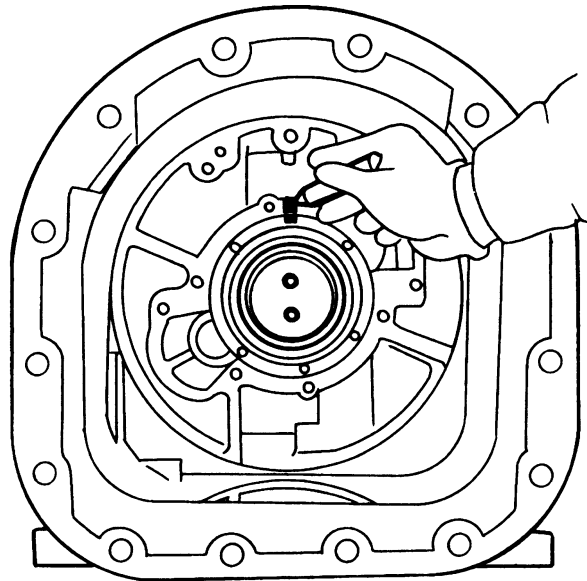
Placing alignment marks on casing and main bearing holder
